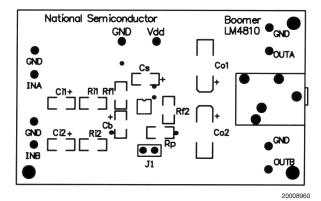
Recommended PC Board Layout Component-Side Silkscreen
